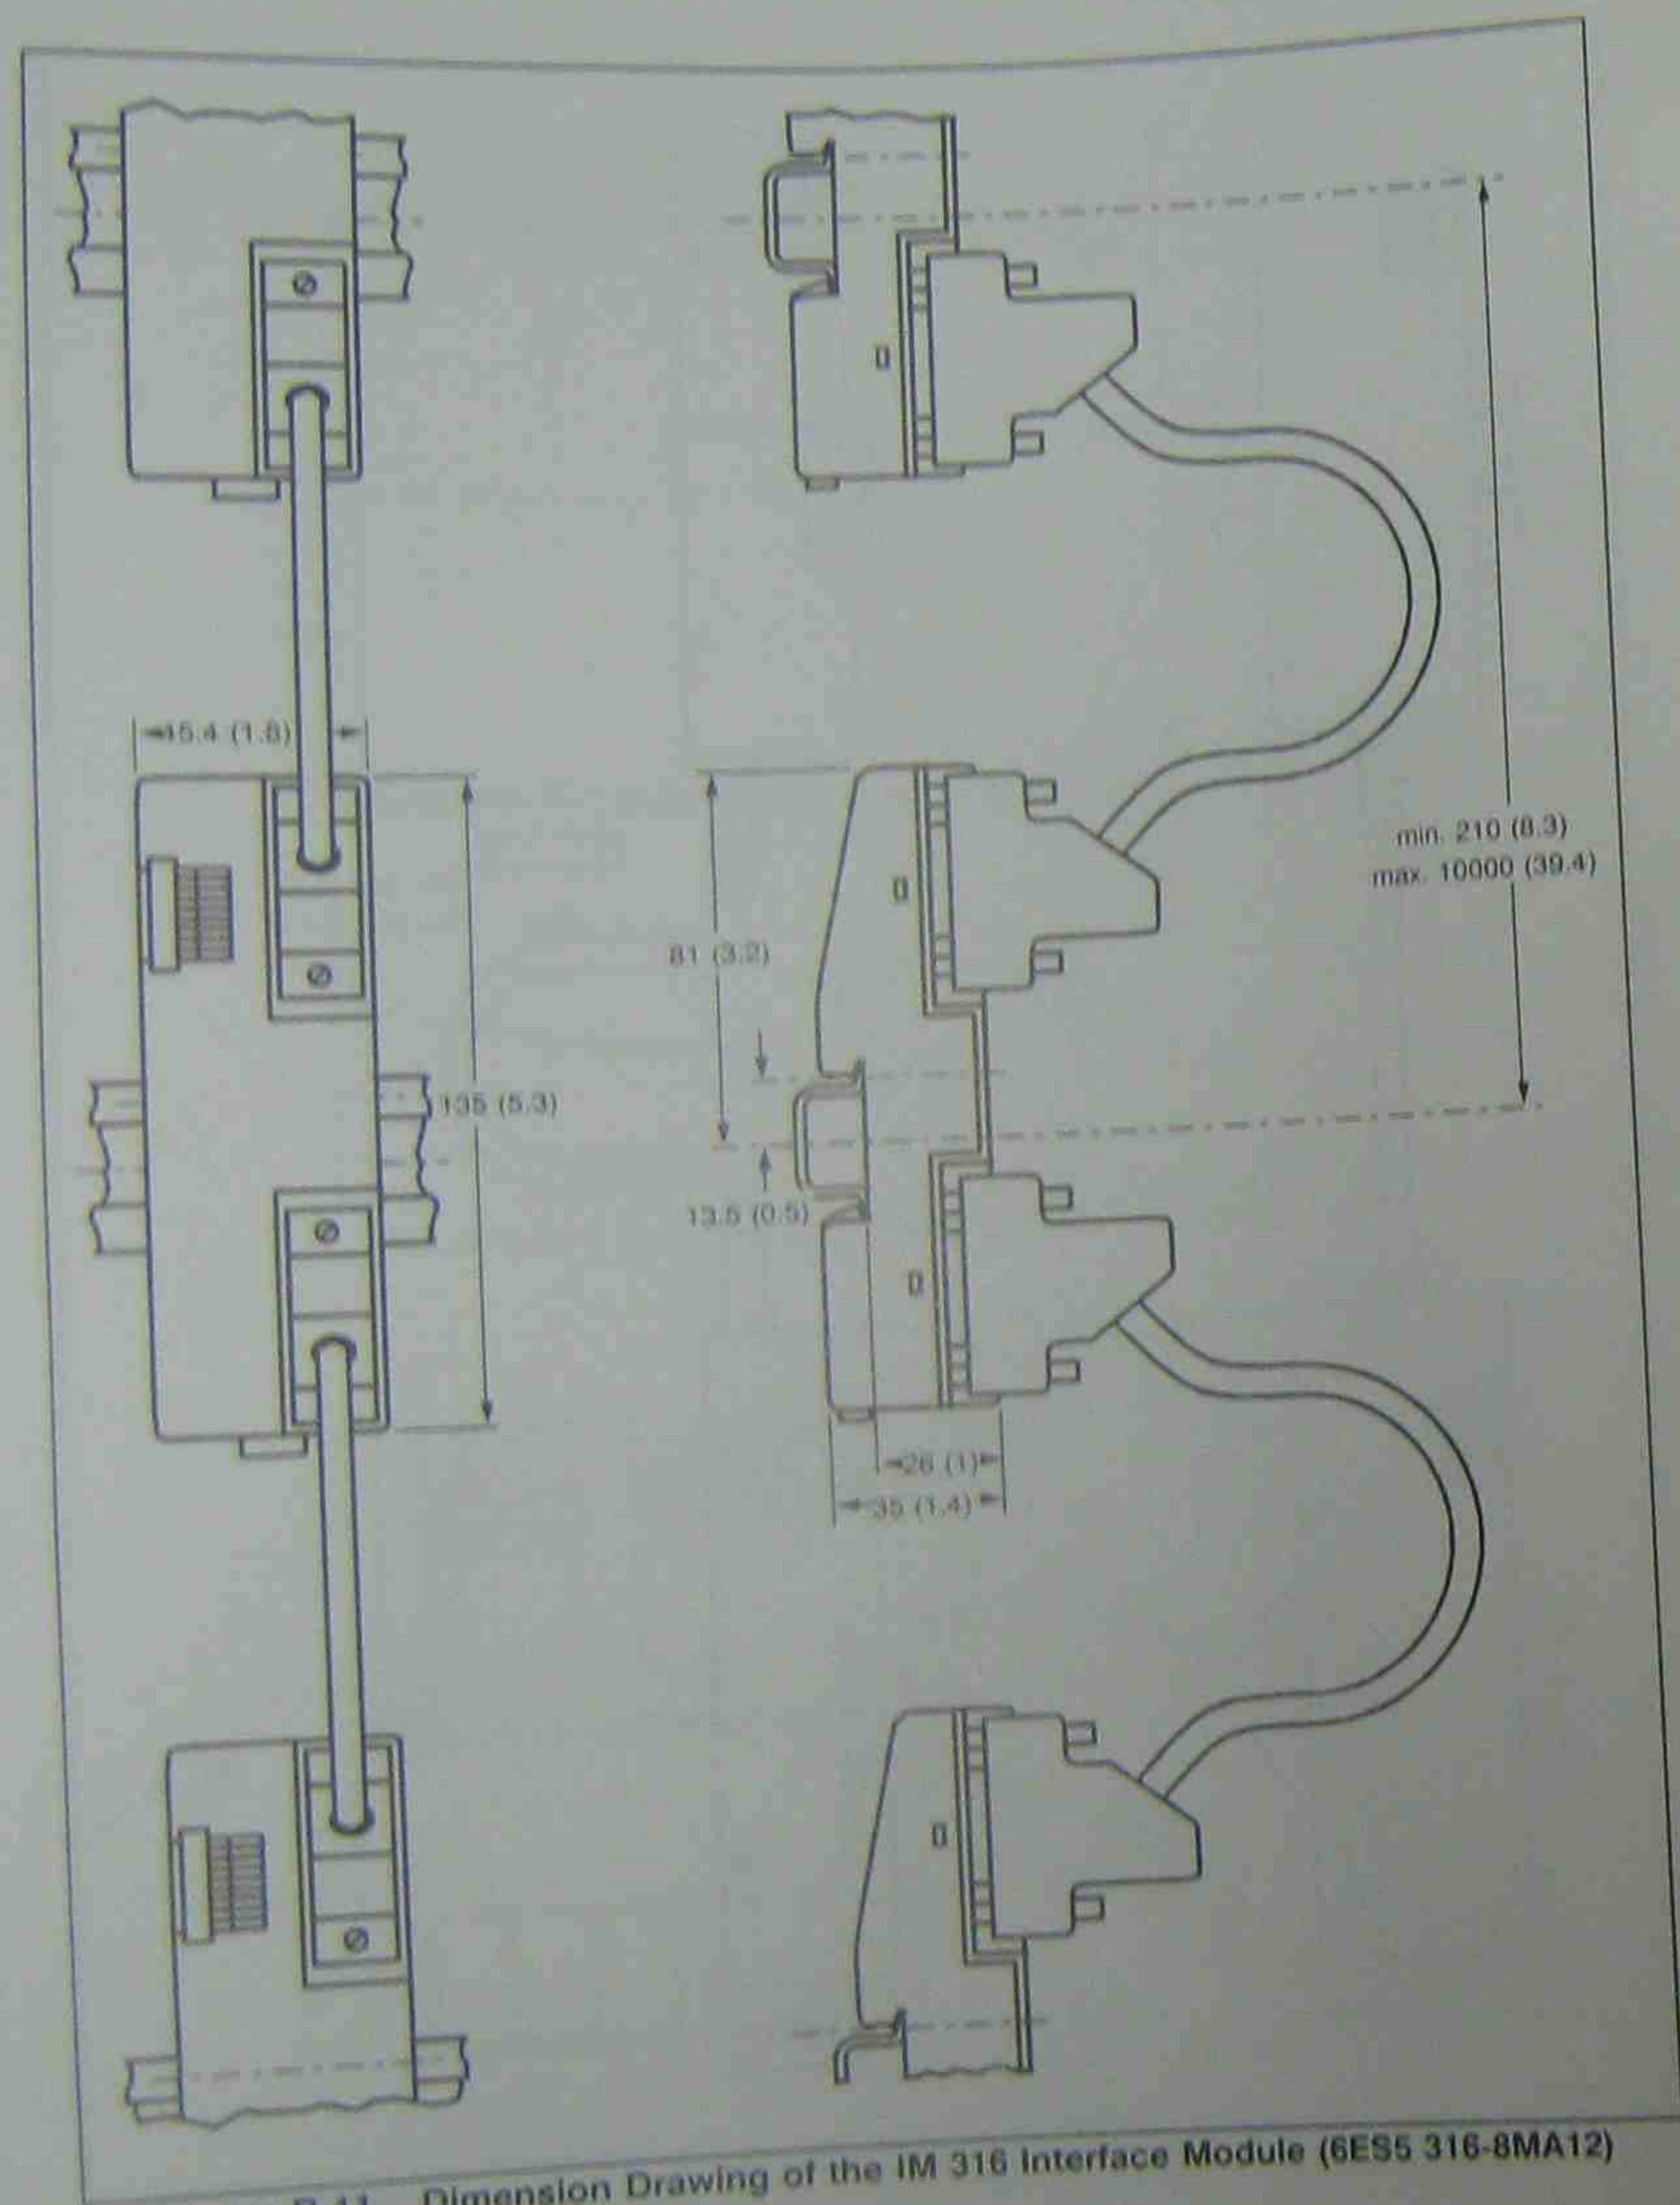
Dimension Drawing of the IM 316 Interface Module (6ES5 316-8MA12)
